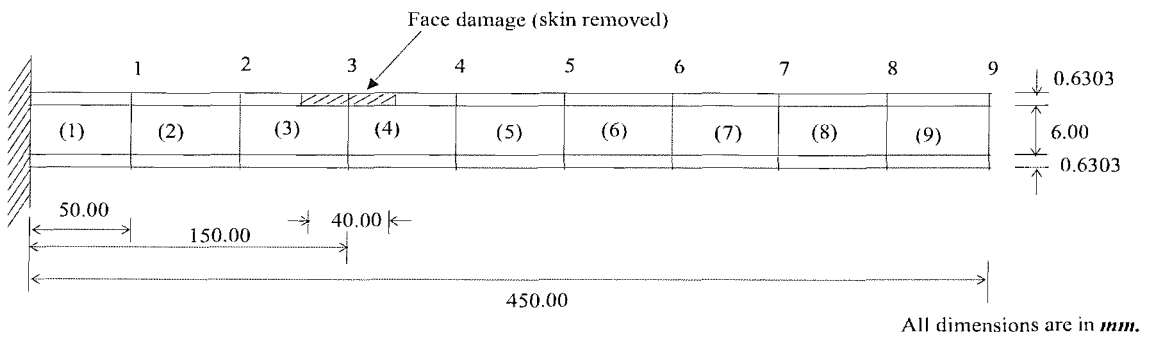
Geometrical dimensions of the beam specimen for damage located at 150 mm from the fixed end.
